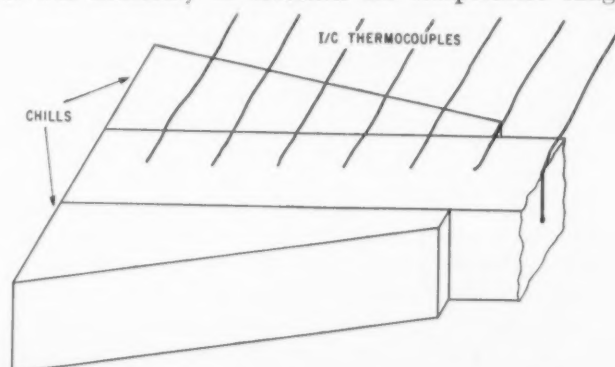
33 × 3 × 16 in. bar casting used for cooling rate samples.
